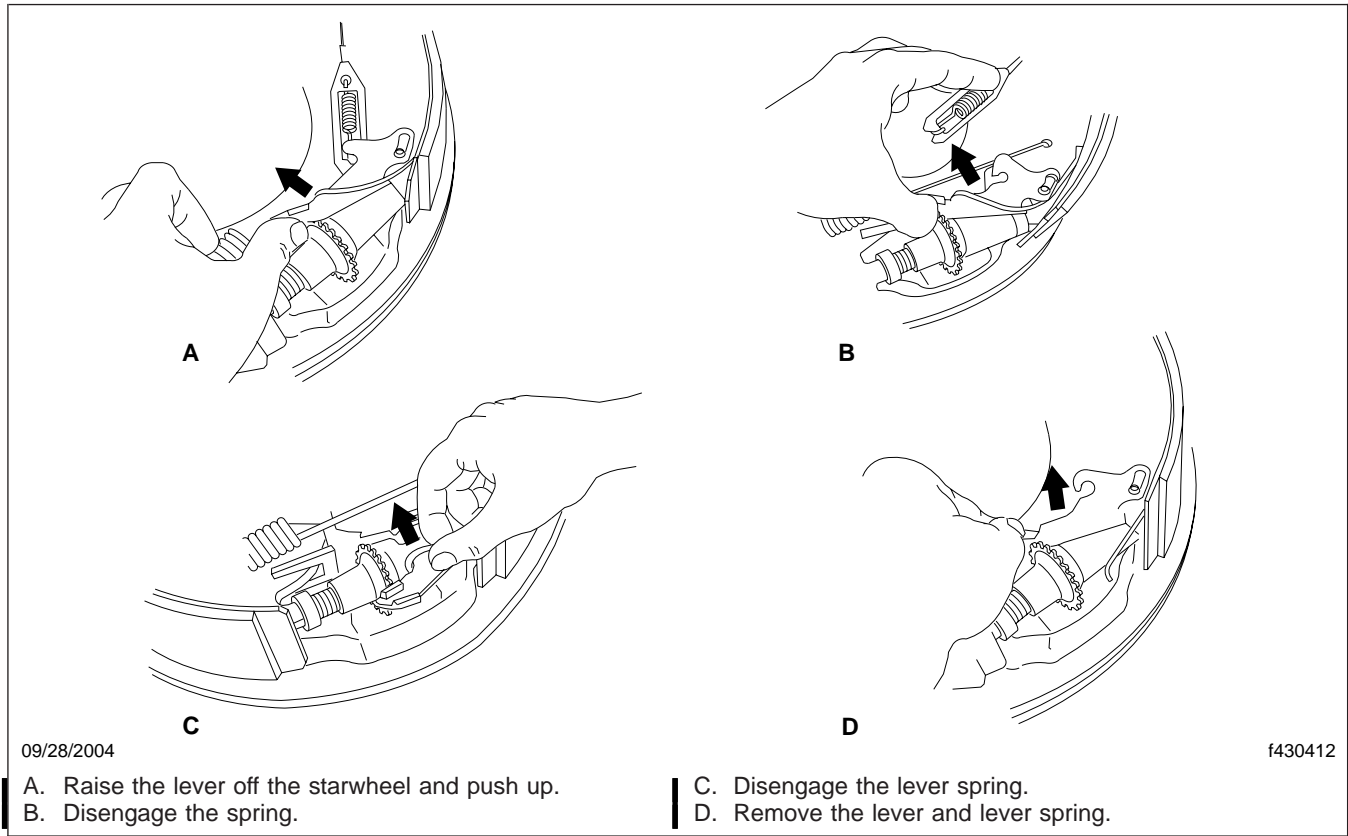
, Adjuster Lever and Adjuster Spring Removal
